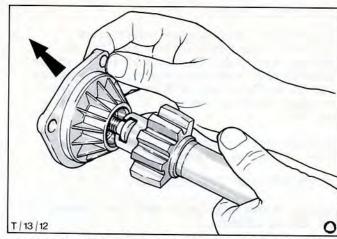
Separate rocker shaft from side cover and adjusting screw.
